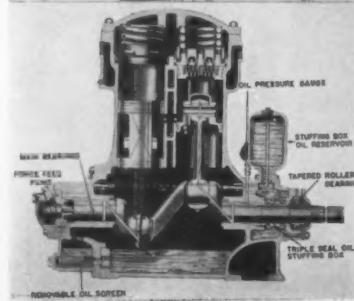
Cross section of a Vilter Freon-12 compressor showing force-feed oiling system and triple-seal.
